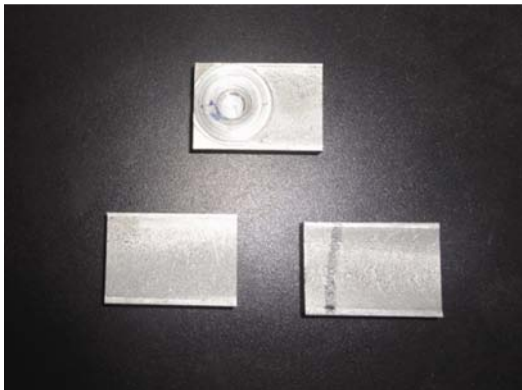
The weldments specimen of size 29×20 mm of 7075 T6 and 2024 T6 plates samples
